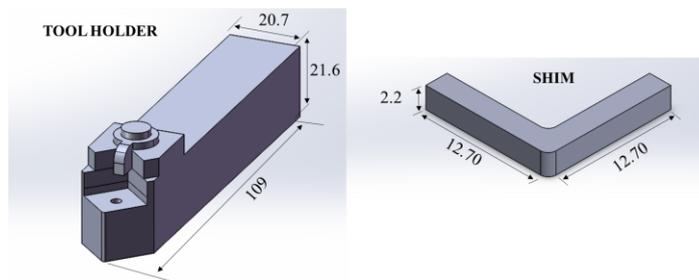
Fundamental dimensions of the 3-D tool holder and shim.
